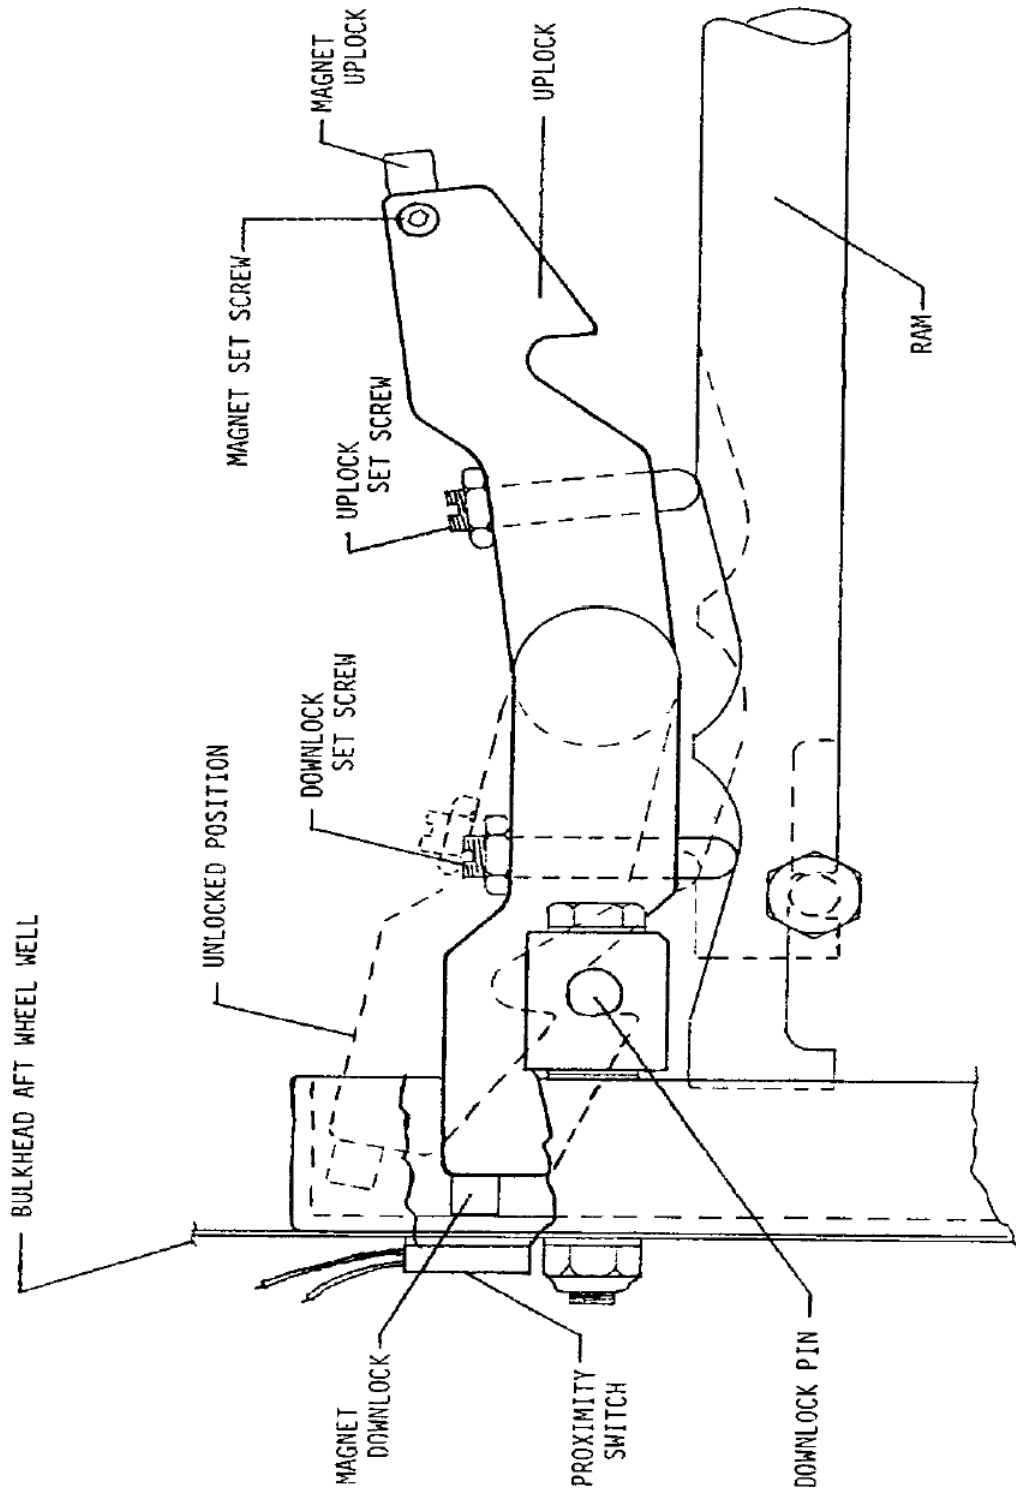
MAIN GEAR LOCKING SYSTEM
